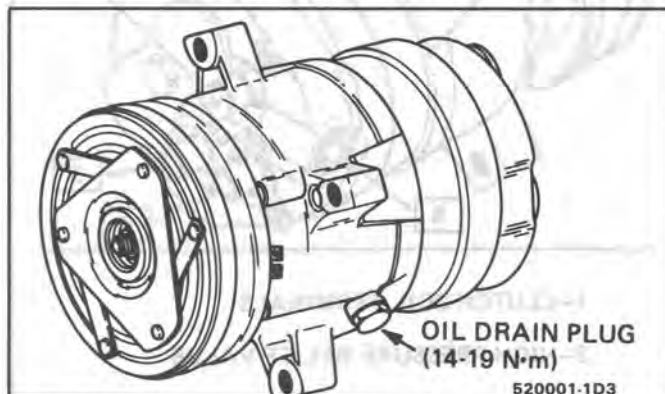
V5 Compressor, V-Groove Pulley & Standard Mounting
